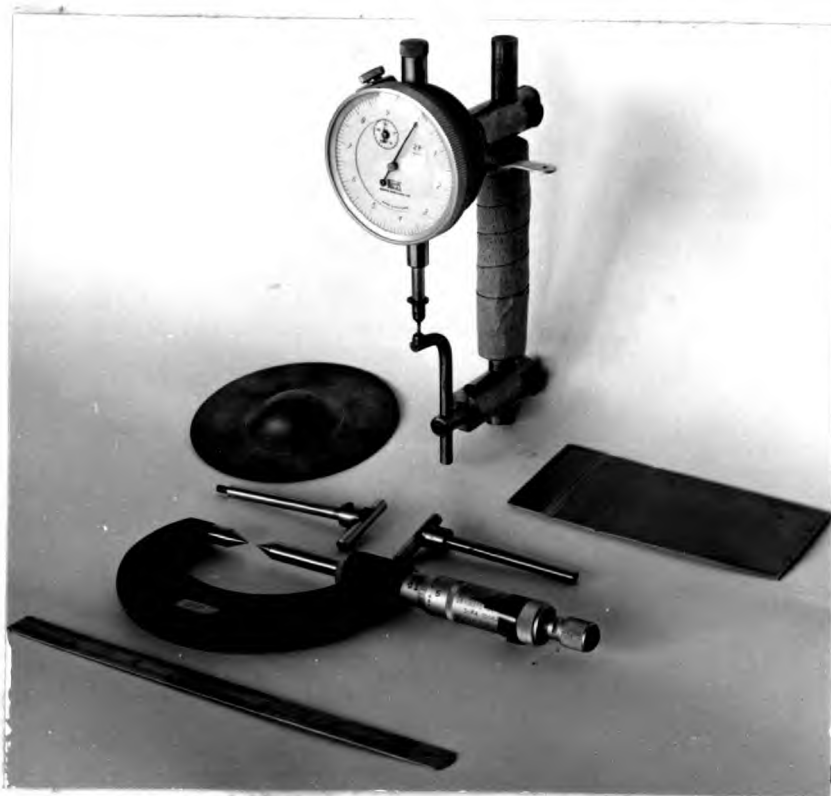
THICKNESS MEASURING RIG, STRETCH FORMING AND PLANE STRAIN SPECIMENS, SPECIAL ANVILS FOR TENSILE SPECIMEN, MICROMETER AND RULER
